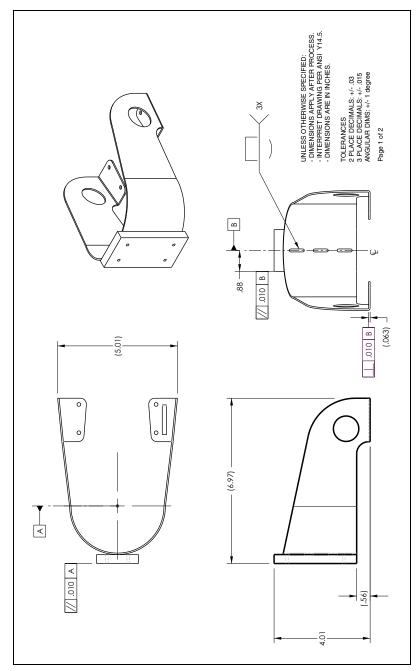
Camera Bracket Drawing, Page 1 of 2
